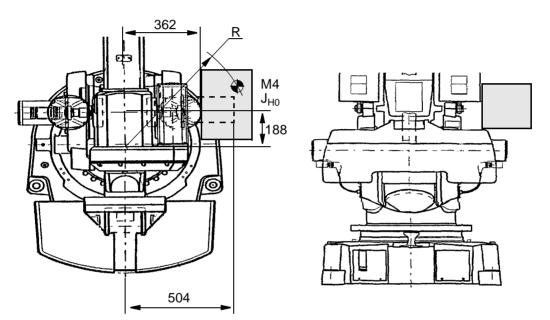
Extra load on frame of IRB 6400 /2.4-120, /2.4-150, /2.4-200, /2.8-120, /3.0-75, FHD and IRB 6400PE /2.25-75 (dimensions in mm).
